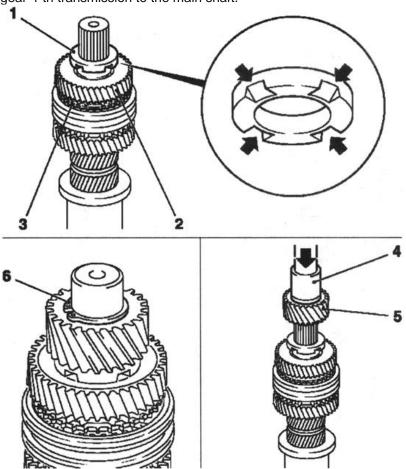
Setting dentate wheels 4 - th transfer on main shaft with hand Leading On wheels:
